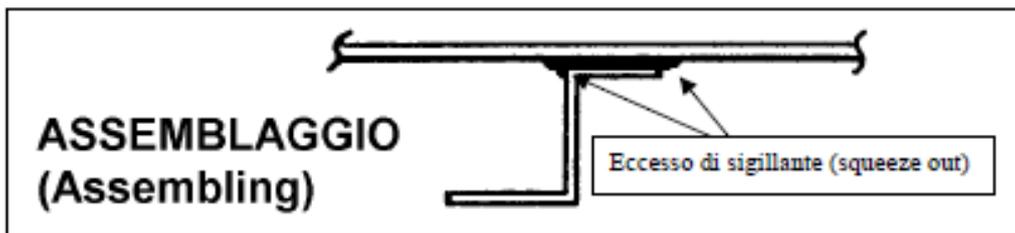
Check that the squeeze out of sealant is uniform along the edge, visible and enough to allow the correct final finishing of the sealing.
